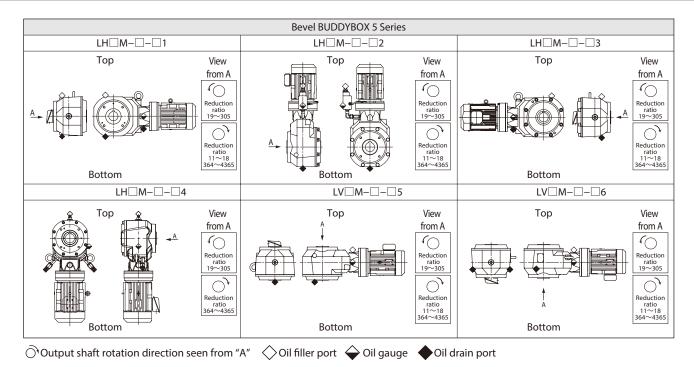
Rotational Directions of Output Shaft and Locations of Oil Fill and Oil Drain Ports (Example: Hollow Shaft, Shaft Mount)
